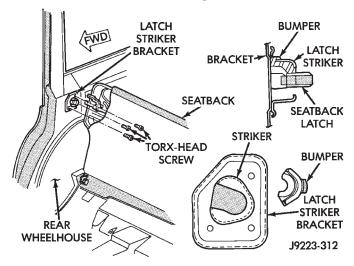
Seatback Latch Striker Bracket Removal/ Installation
